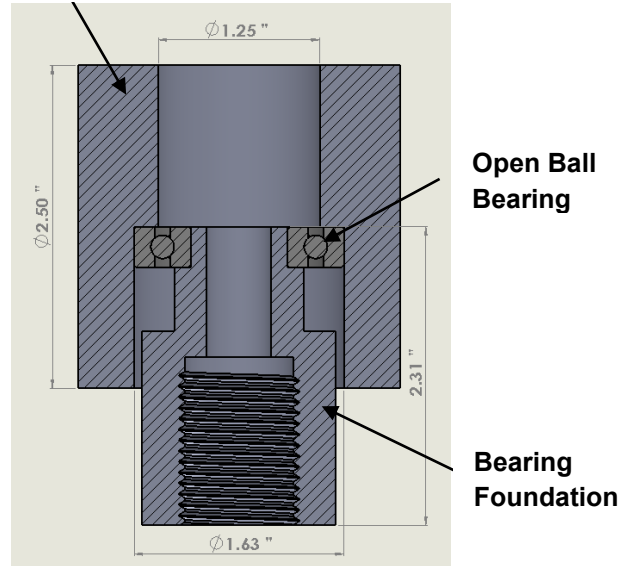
Passive yaw bearing assembly with basic dimensions (in).
